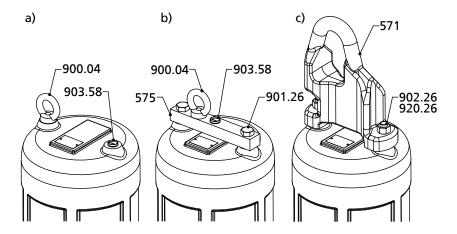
Attachment elements a) bolt for guide wire arrangement b) bolt for guide rail arrangement c) bail
